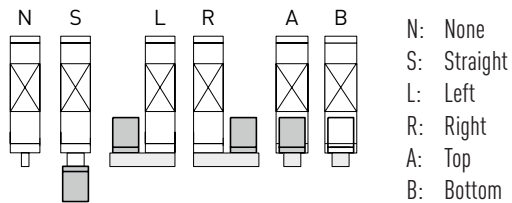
Drive interfaces of the linear axes HM-S and HT-S
